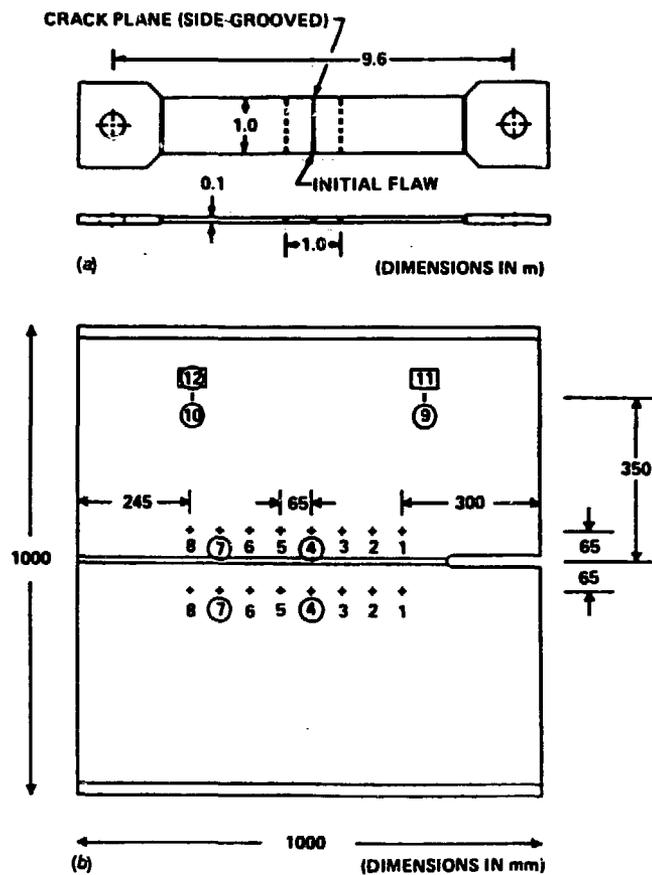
Wide-plate assembly and crack-arrest specimen: (a) pull-plate assembly; (b) specimen with strain-gage locations.
